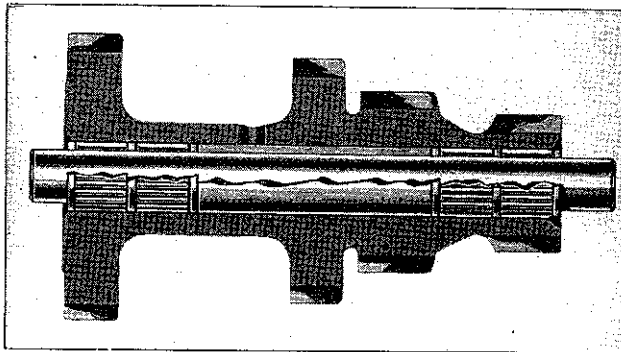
COUNTERSHAFT GEAR BEARINGS
